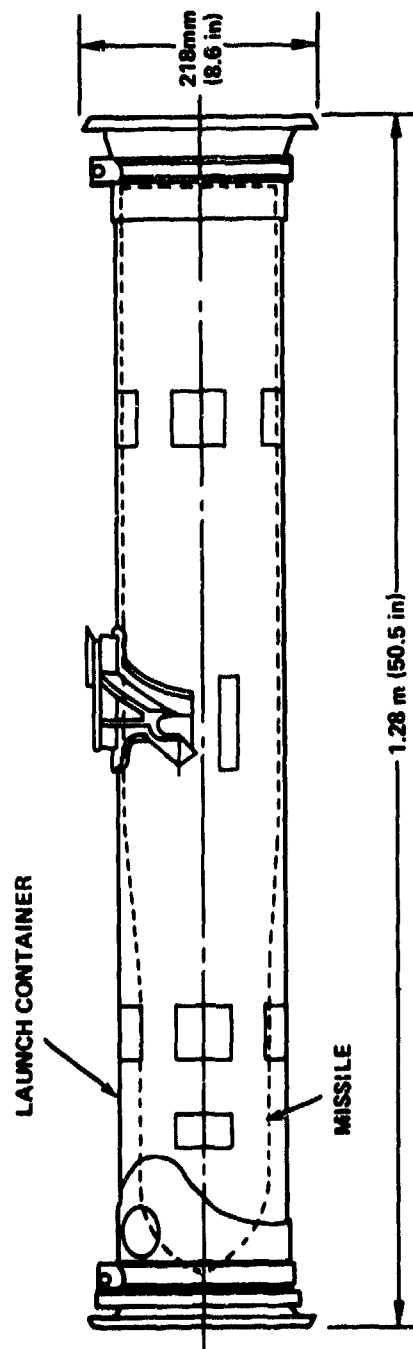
BGM-71A-1 TOW GUIDED MISSILE LAUNCH CONTAINER
